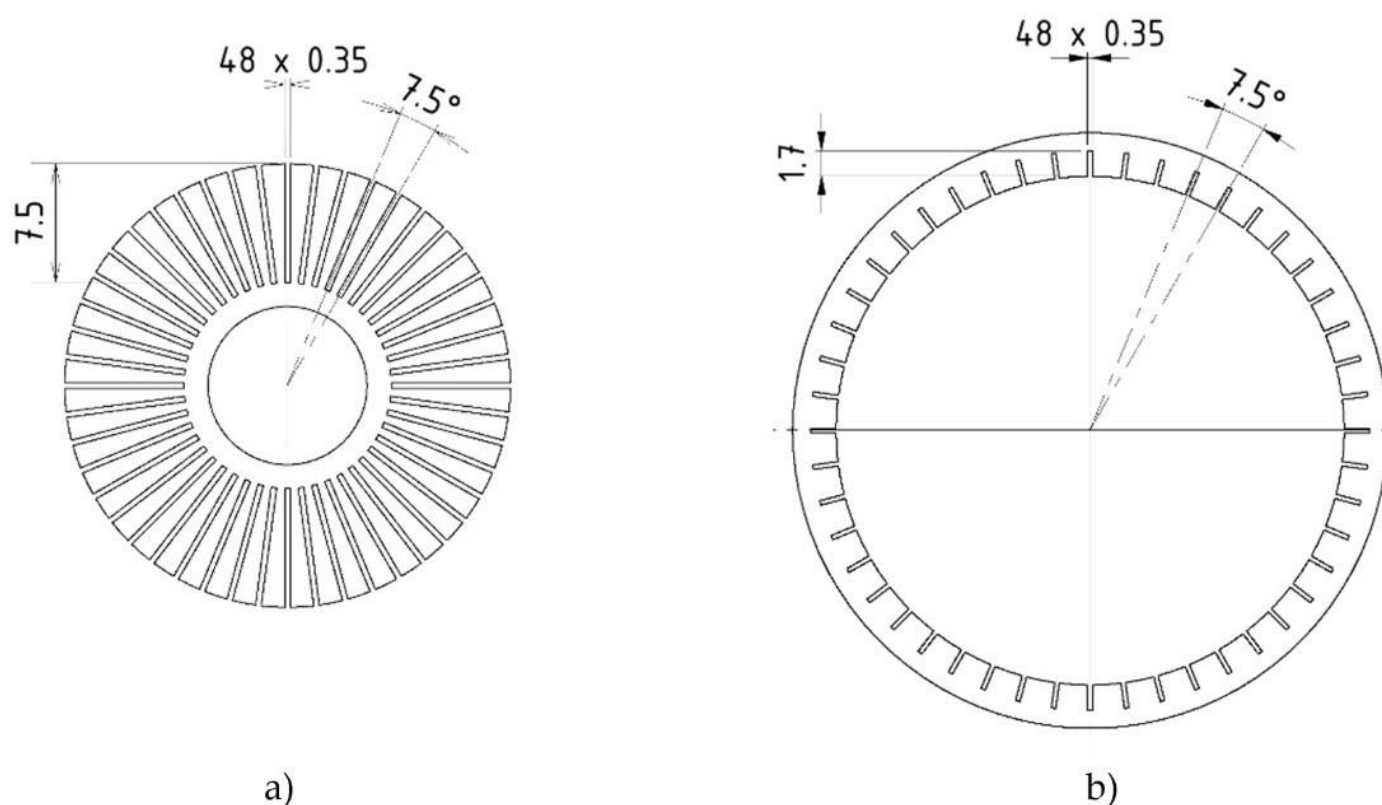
Drawing of grooved (a) core; and (b) outer cylinder.
